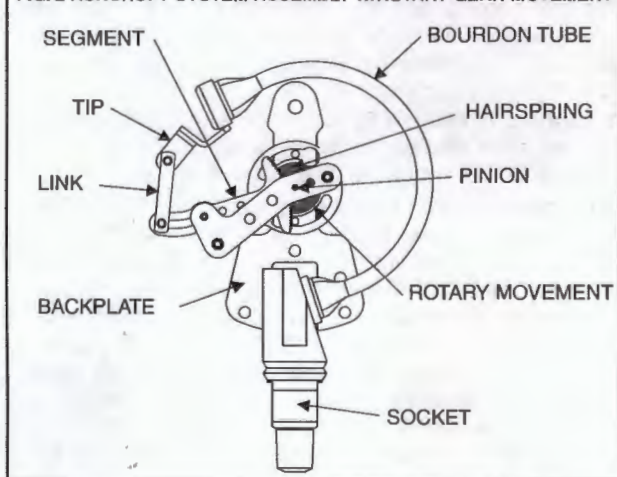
A ASHCROFT TYPE 1259 SYSTEM ASSEMBLY
